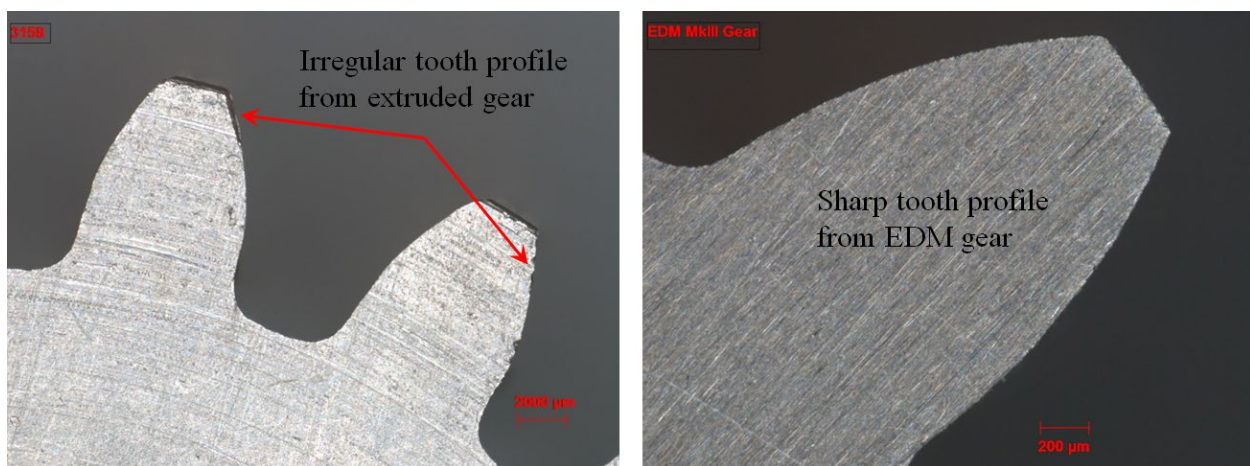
Microscope images of tooth profiles from spur gears fabricated from extrusion (*left*), and wire EDM (*right*)
